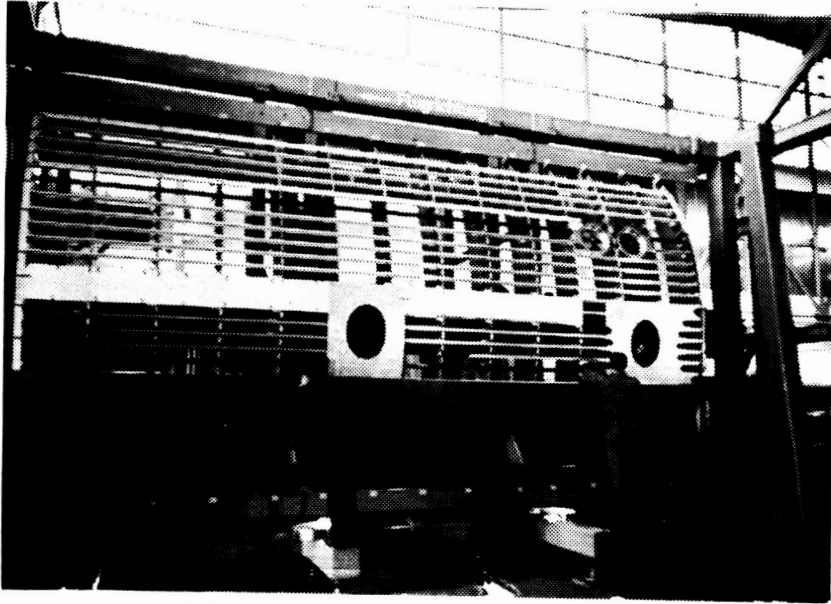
EXAMPLE OF A SUBASSEMBLY JIG
